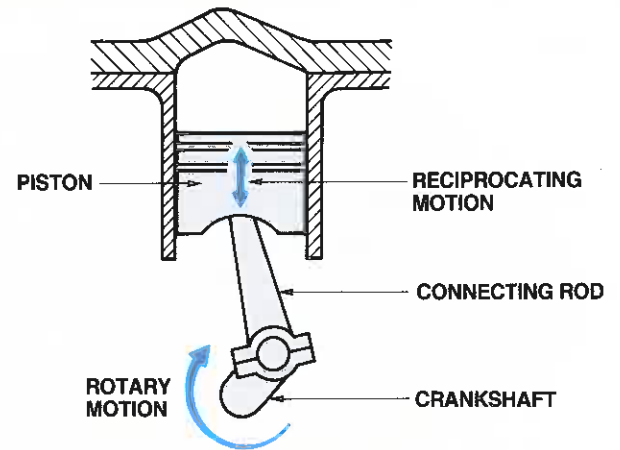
In a reciprocating engine, a piston moves up and down, causing rotary motion at the crankshaft.
